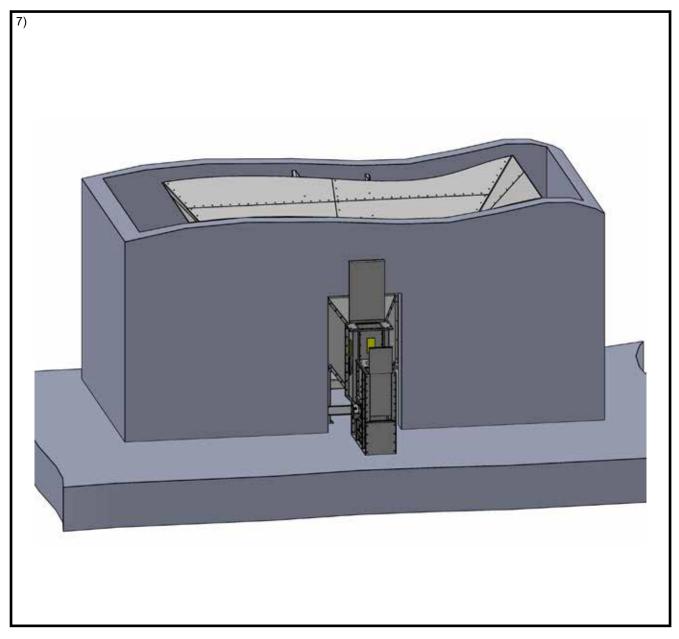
Install the intake spout before installing the elevator. This way you can put the bolts in place through the spout. As required, drill holes into the lower edge of the connecting part.
